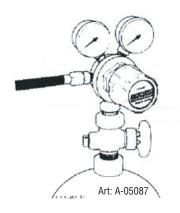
Fit Regulator/flowmeter to Cylinder
